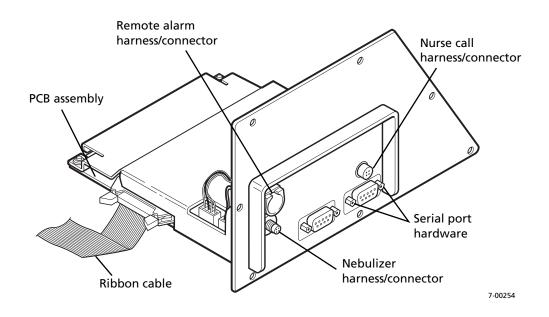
Disassembling Communications option assembly (remote alarm, nebulizer, nurse call, and serial port hardware)
